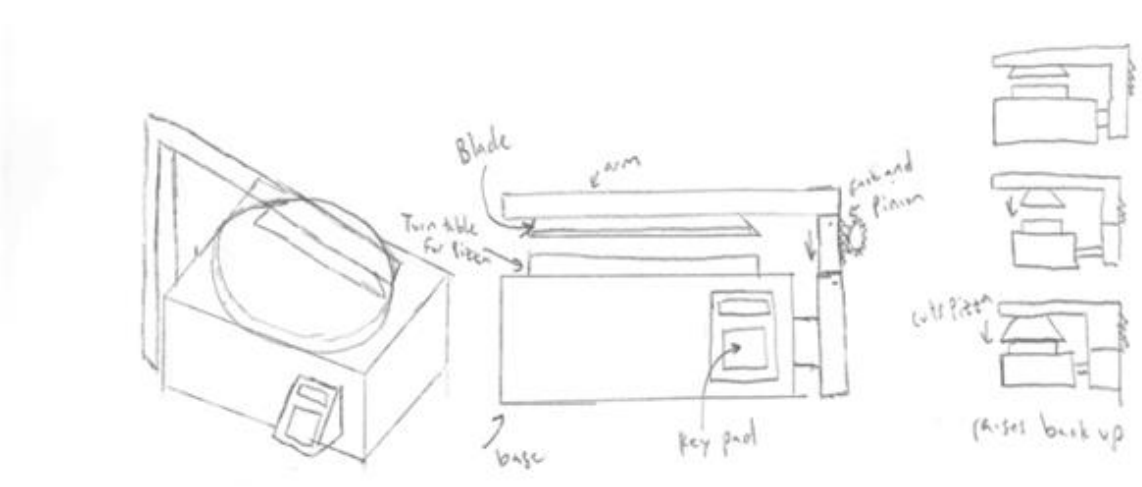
Final Pizza Cutter design (Jason Kiehne)
